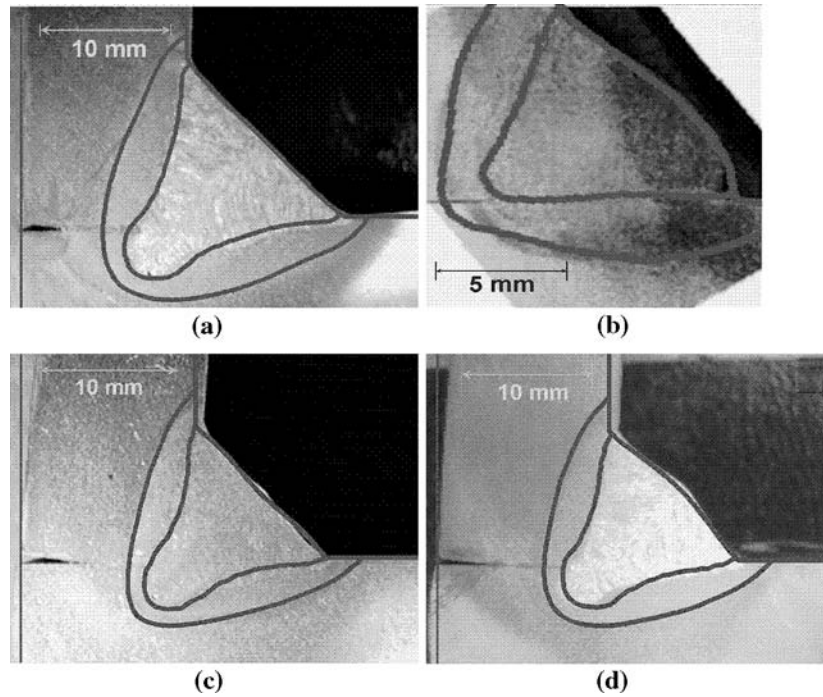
Comparison between the calculated and experimental weld geometry during GMA welding of (a) V-shaped symmetric fillet joint using  $I = 362$  A,  $V = 33$  V,  $U = 4.2$  mm/s, and  $w_f = 211.7$  mm/s; (b) L-shaped symmetric fillet joint using  $I = 250$  A,  $V = 29$  V,  $U = 7.0$  mm/s, and  $w_f = 150.0$  mm/s; (c) downhill welding at lift angle = 6 deg using  $I = 362$  A,  $V = 33$  V,  $U = 6.4$  mm/s, and  $w_f = 211.7$  mm/s; and (d) uphill welding at lift angle = -4 deg using  $I = 322.6$  A,  $V = 32$  V,  $U = 5.3$  mm/s, and  $w_f = 190.5$  mm/s. The experimental micrograph in (b) is taken from Ref. 21. The inner isotherm (blue line) in all these figures represents the calculated weld pool boundary based on solidus temperature of 1745 K, while outer isotherm (blue line) represents the 1073 K temperature.
